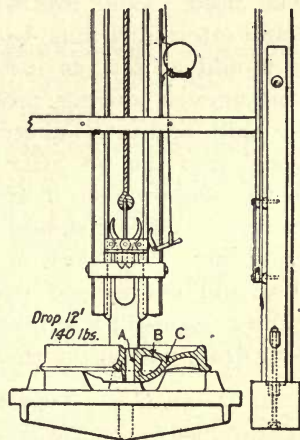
M. C. B. DROP TESTING MACHINE.
